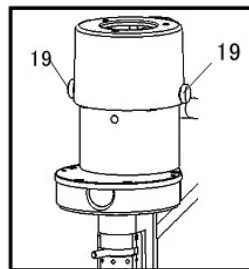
Lamp Housing Cover Retaining Bolts, 19
